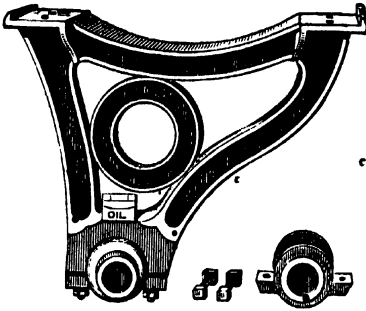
ROLLER BRACKET AND BEARING. [T. Corbett.]
